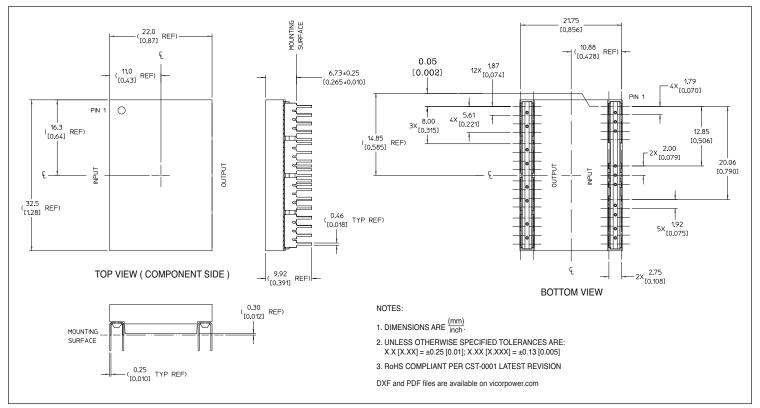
VTM module J-Lead mechanical outline; Onboard mounting
